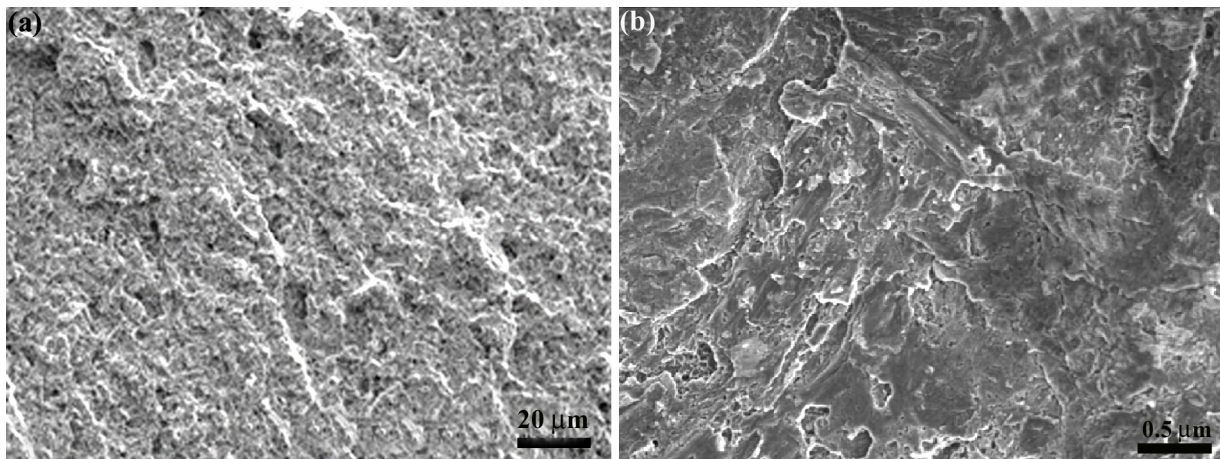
Fractography analysis of the tensile tested joints of the failure location (a) 42CrMo4 and (b) 18Cr-8Ni.
